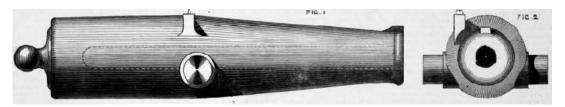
Spanish Palliser 20 cm No. 2 (The Engineer)
